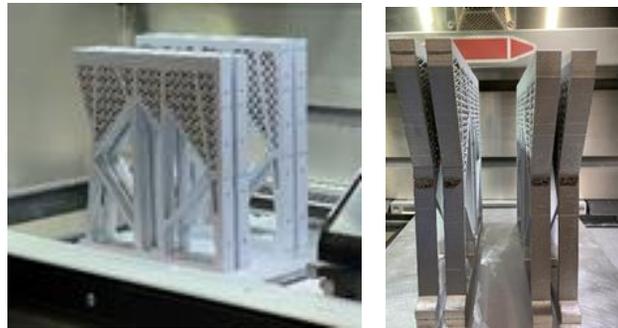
(Left) Completed build containing 4 conservative design side pieces. (Right) Side view of bracket pieces, where the middle shows voids due to short feeding.
